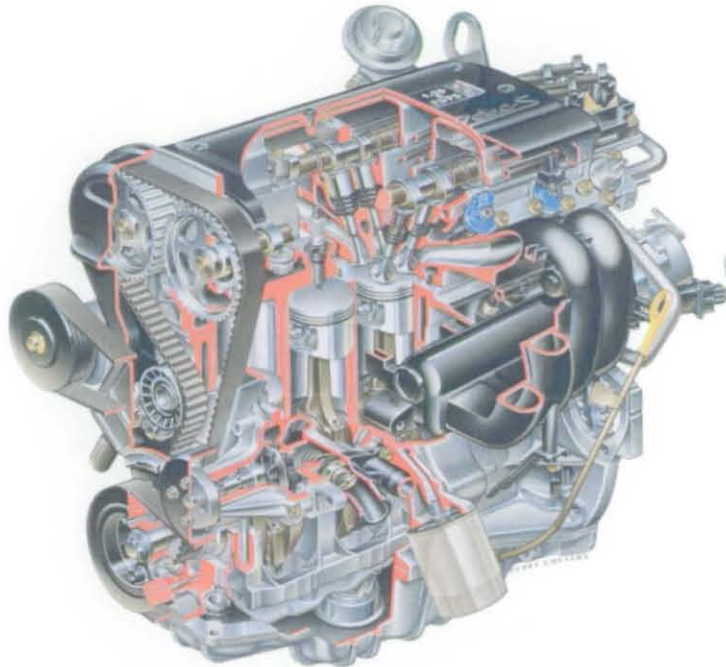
ZETEC-SE Engine Assembly Cut-away
